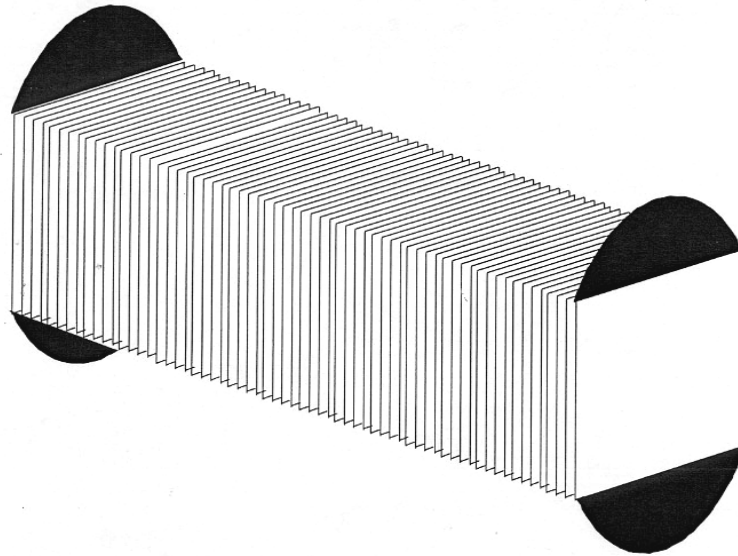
Perspective view of heat exchanger plates with top and bottom baffles for the boiling side [3].
